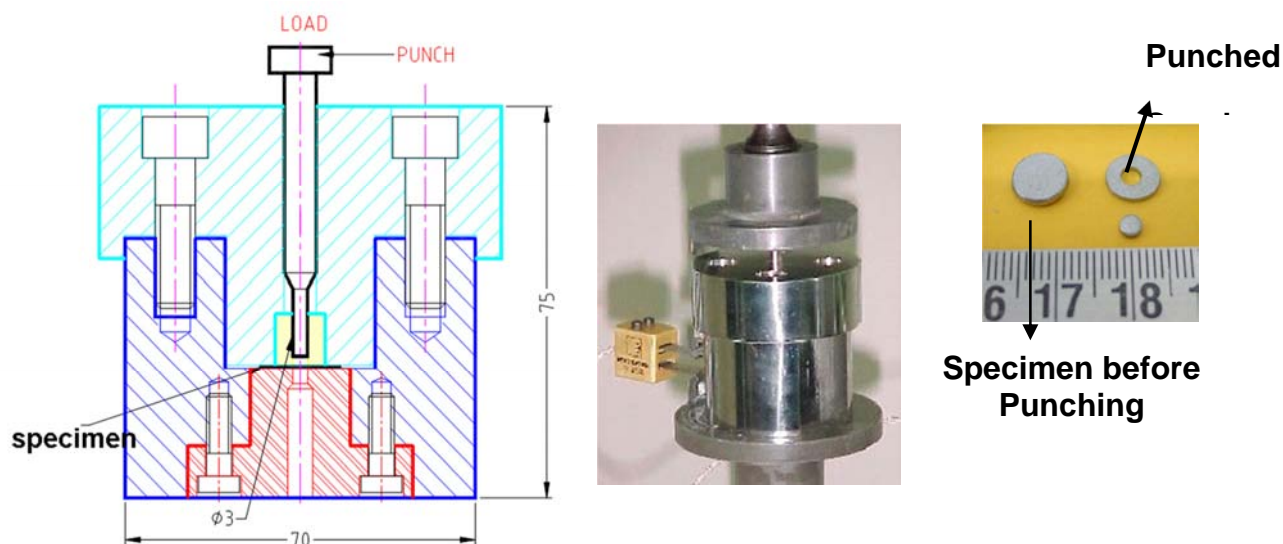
The shear punch test fixture, experimental setup and the miniature specimens.
